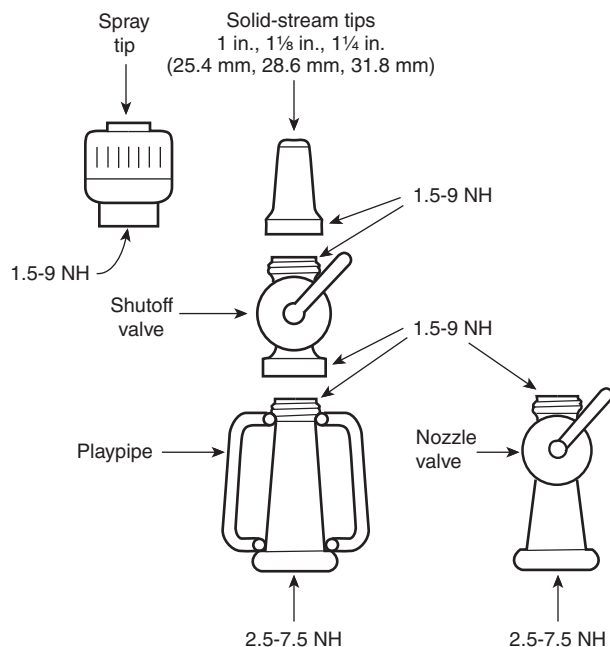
Nozzle Assembly for 2½ in. (65 mm) Hose.
